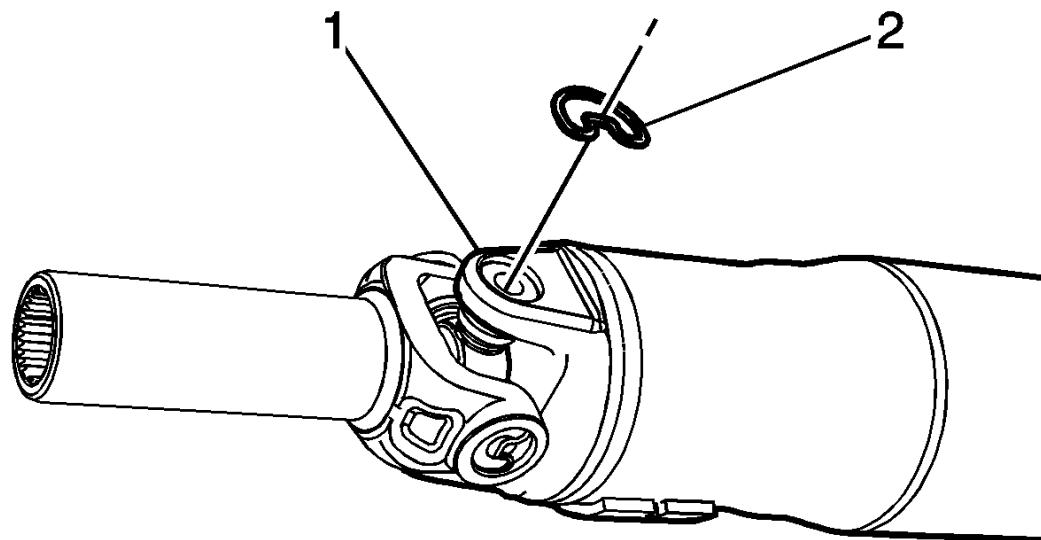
Retaining Ring & Propeller Shaft Yoke
